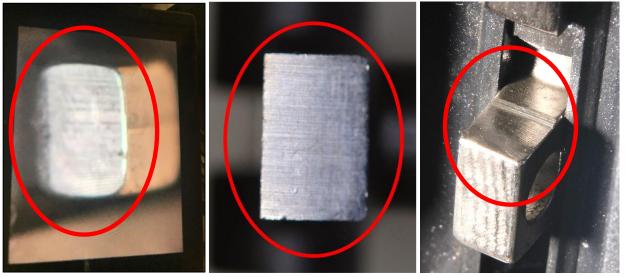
Other firearms - striker foot (left), and sear face (center), and striker foot (right), all with machined flat surfaces
